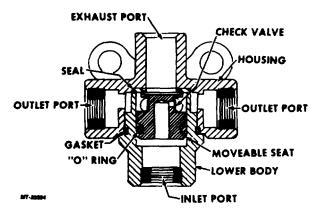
Cross Section of Spring Brake Exhaust Valve
